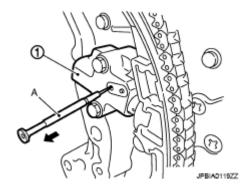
Pulling Stopper Pin Courtesy of NISSAN MOTOR CO., U.S.A.
